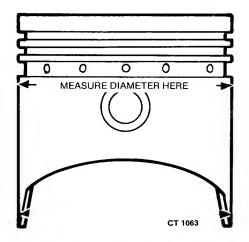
PISTON CLEARANCE MEASUREMENT
